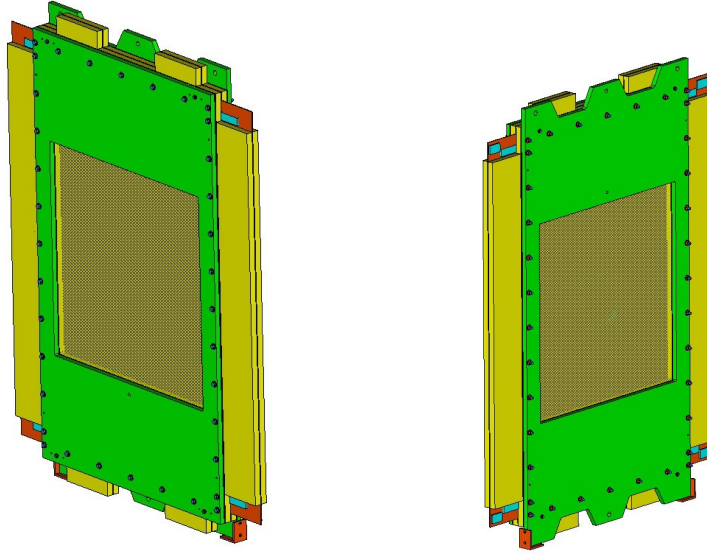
Technical drawing of front (Left panel) and back (Right panel) plates.
